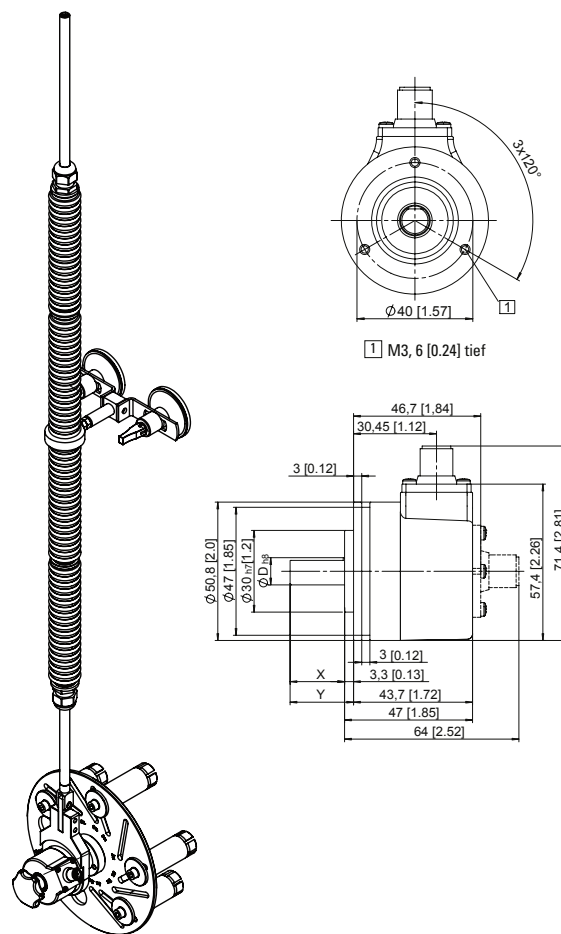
WPT sensor dimensions (left side: including holder WPT)
